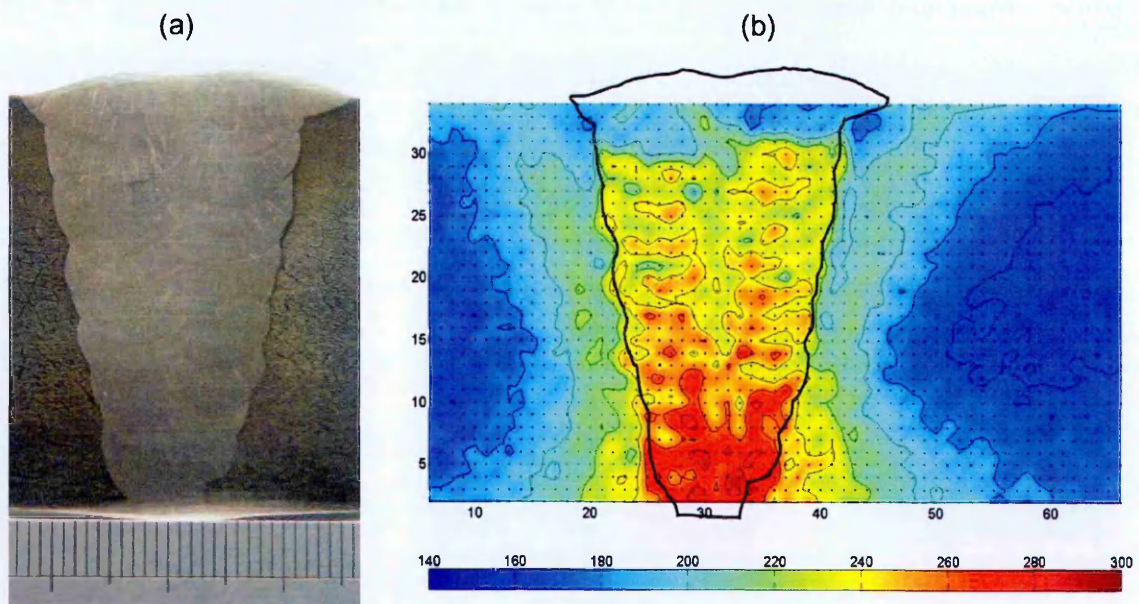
Weld macrographs and Hardness maps of Esshete weldment.
